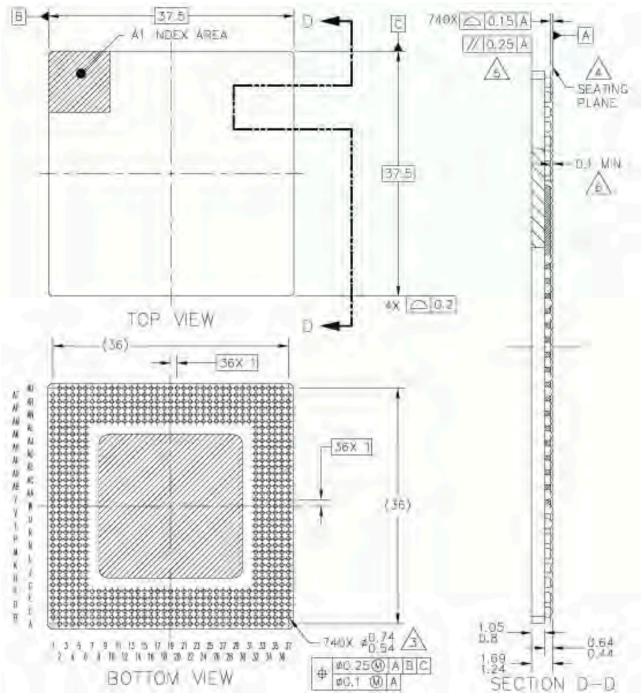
Mechanical Dimensions and Bottom Surface Nomenclature of the TBGA Package
